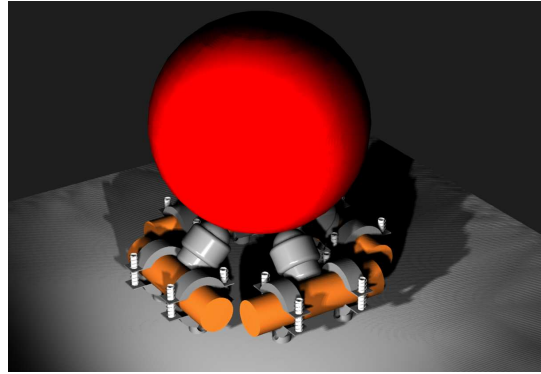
& 4. Ball Bearing in Bowl device perspective and side views.
